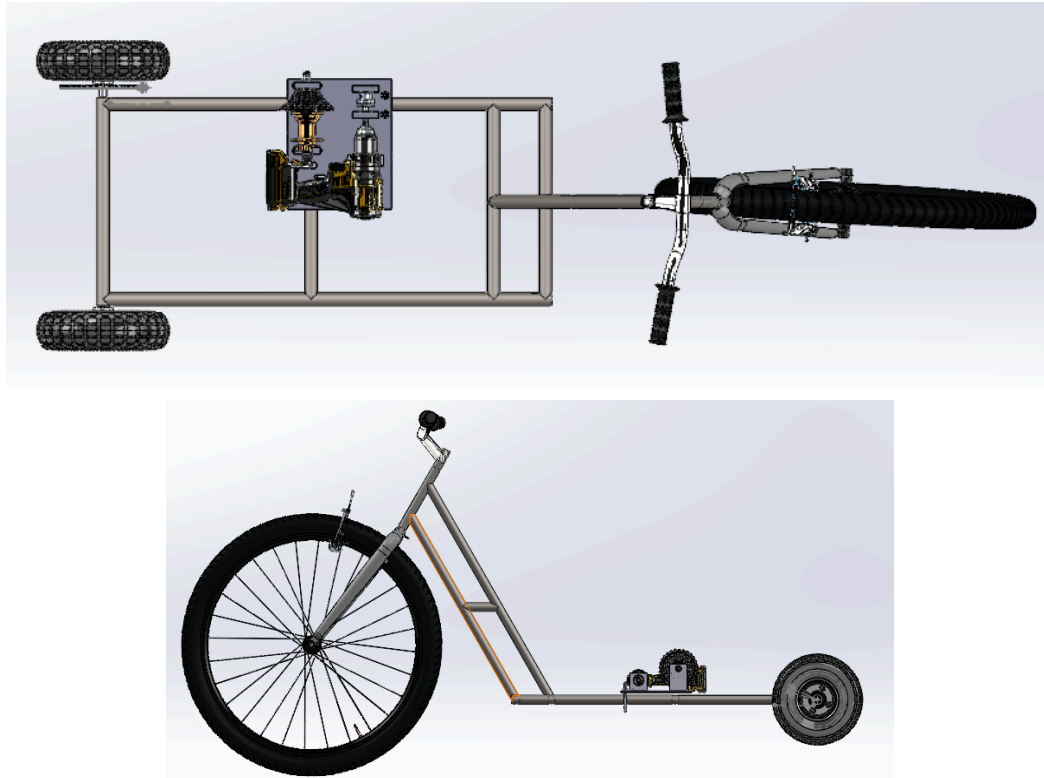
& 4. Comprehensive CAD drawing of the final design, capturing the intricate assembly and engineering precision that brings our vision to life
